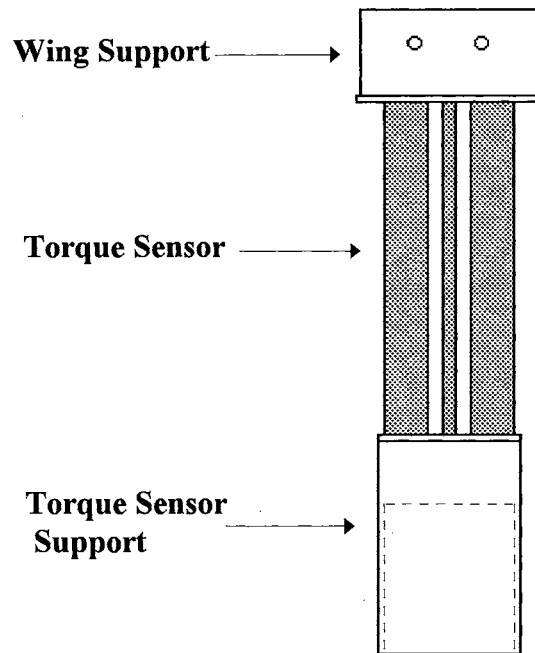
Final assemble of the torque sensor with wing support and sensor support.
